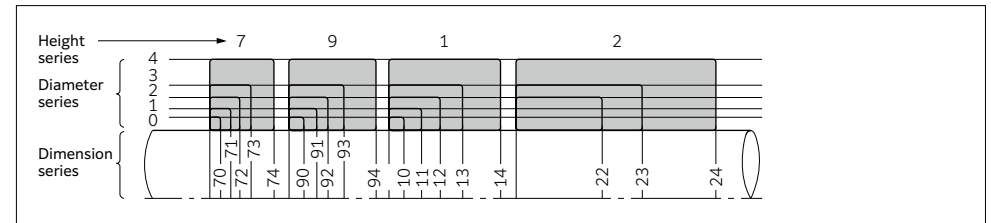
Dimension series for thrust bearings (excluding diameter series 5)
